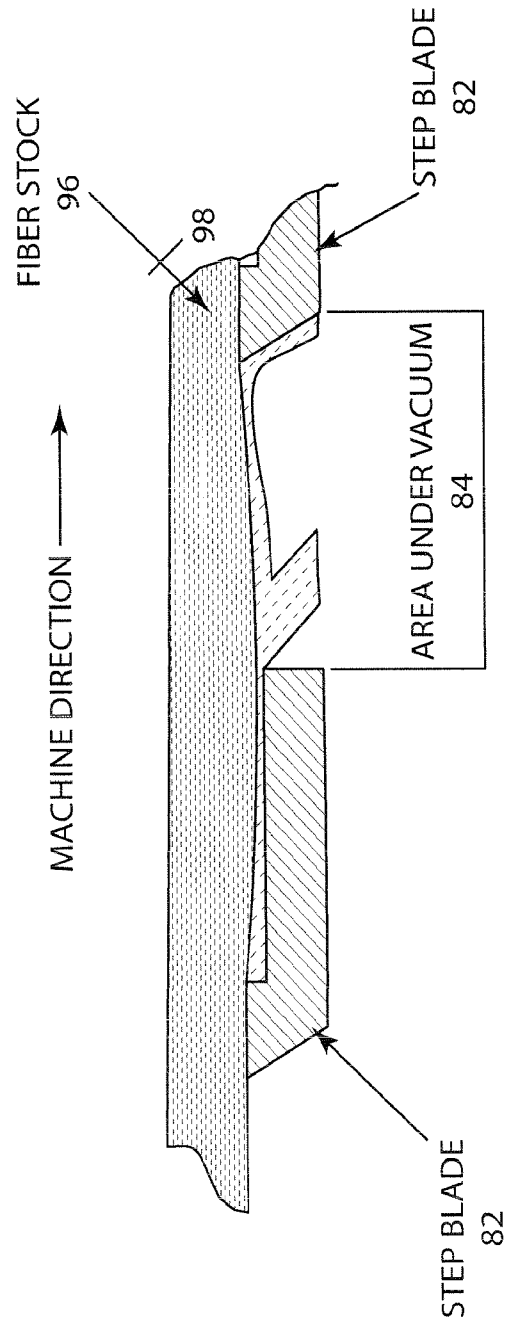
LOW VACUUM BOX WITH STEP BLADE
